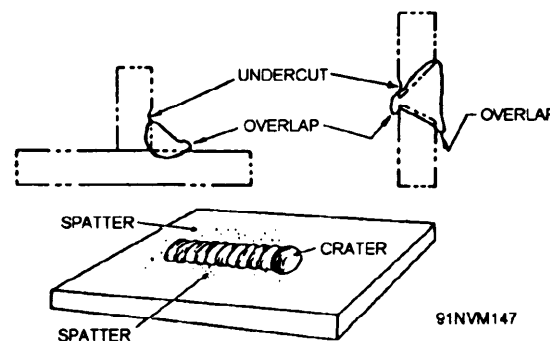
Visible weld defects: spatter, overlap, and undercut.
